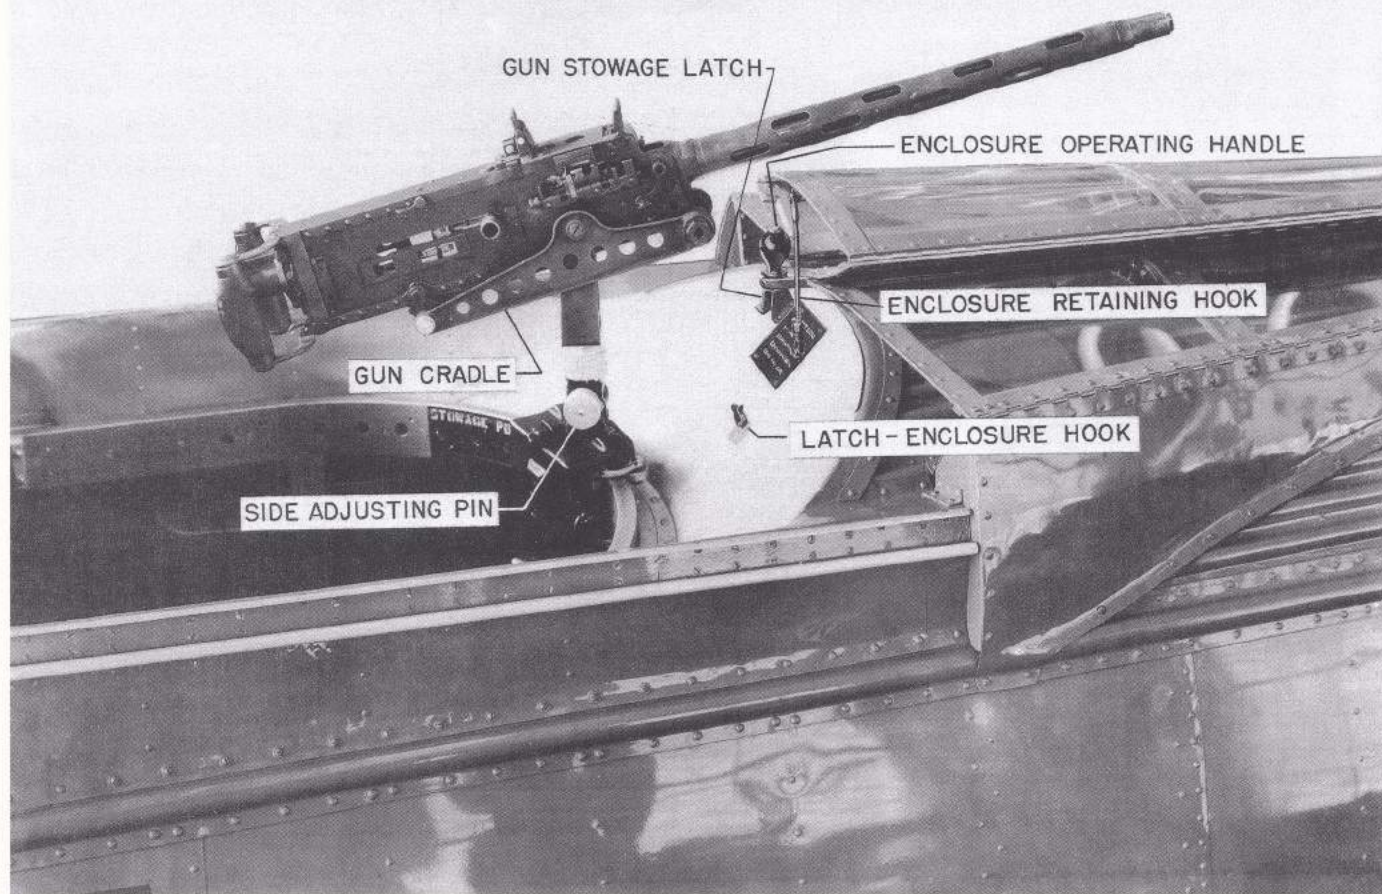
UPPER REAR MACHINE GUN INSTALLATION
